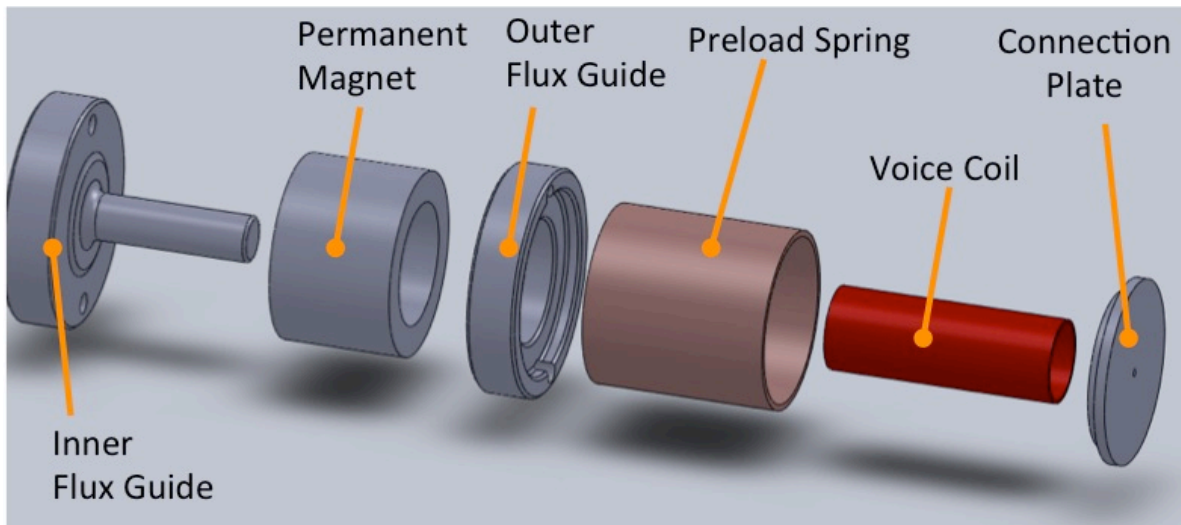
Computer aided design (SolidWorks; Dassault Systems SolidWorks Corp.) 'exploded view' of DHDA component assembly
